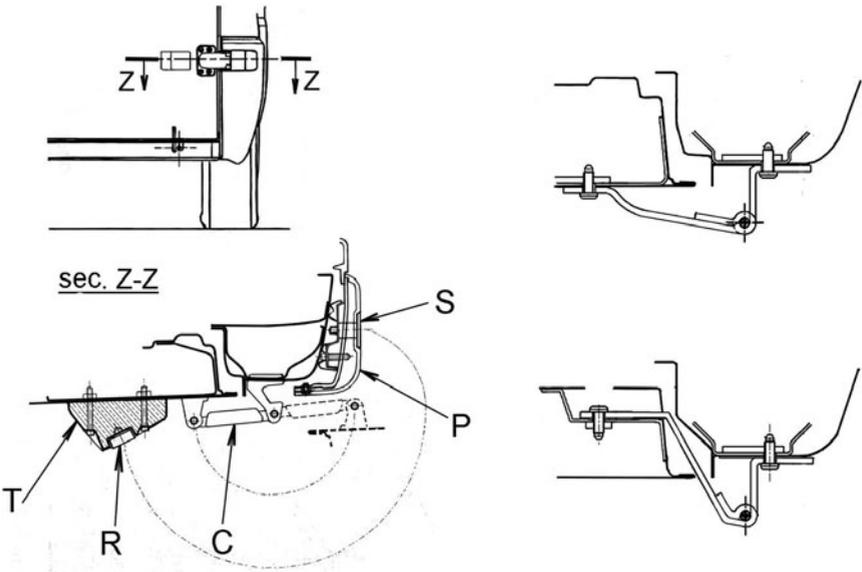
Examples of rear twin doors hinges. C: double joint hinge, opening up to 270°; P: side bumper; T: rubber pad on door; R: magnet; S: striker for magnetic retainer. On the right, single joint hinges.
